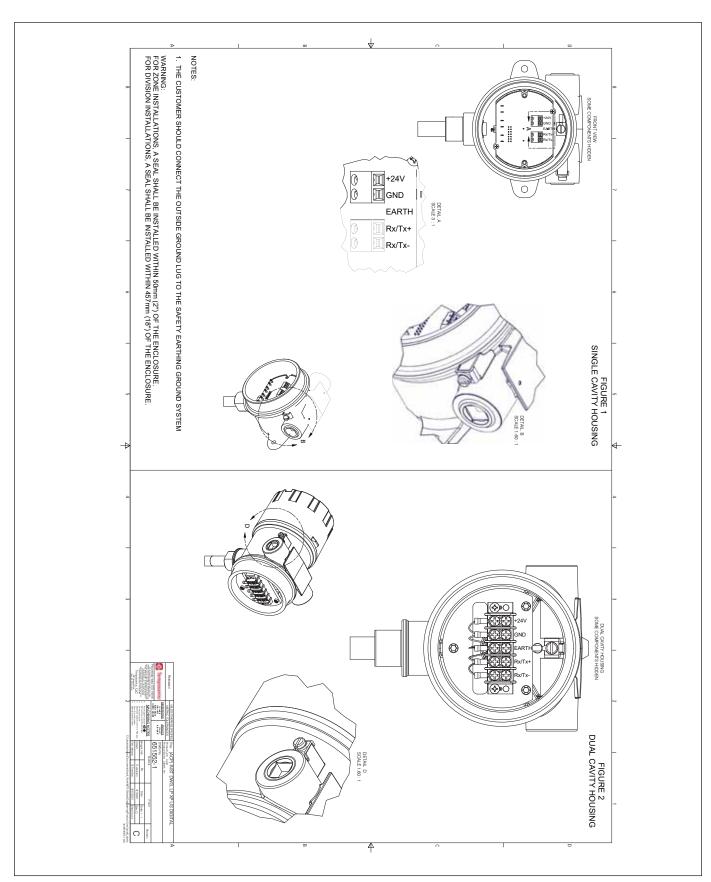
Explosionproof, FM Installation Drawing, Modbus and DDA, Page 2
